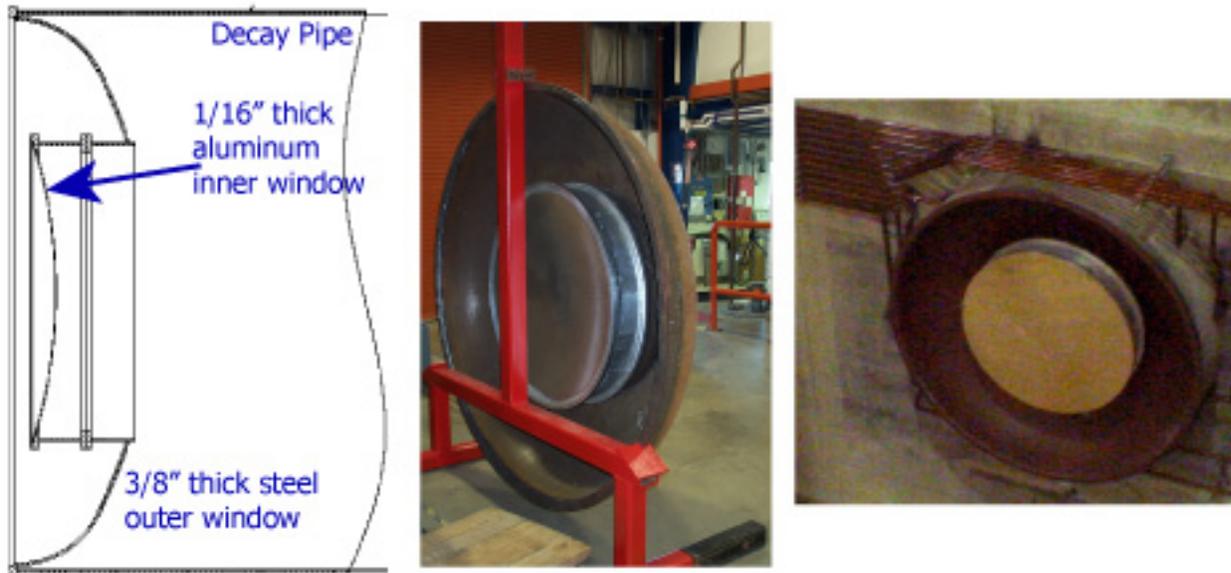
Upstream End Cap. The left diagram shows a cross section sketch of the Upstream End Cap. The center photo shows the fabricated End Cap; the red frame is the lifting fixture for transport of the End Cap and was also used to hold the End Cap in position while being welded into place. The right photo shows the installed End Cap before it was surrounded by shielding. The central aluminum window is covered with plywood to protect it during installation of the Target Hall shielding. Note the copper cooling lines exiting the concrete around the perimeter of the Decay Pipe.
